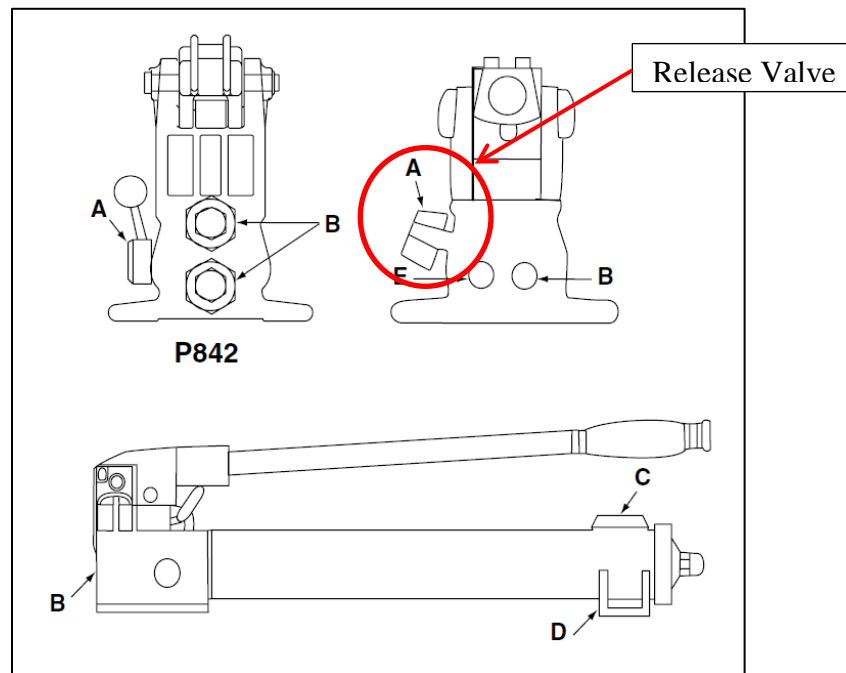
Hydraulic Oil Pump (Enerpac, 2014)
